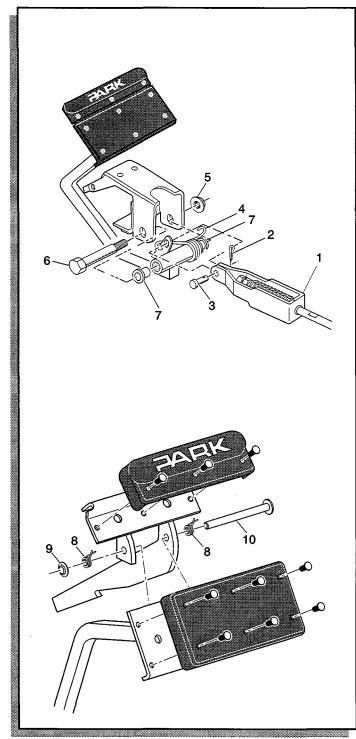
Removing the Brake Pedal Brake Pedal Removal
